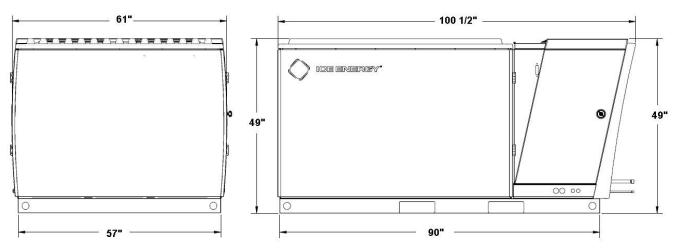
Ice Bear[®] Unit Rear & Side Views
